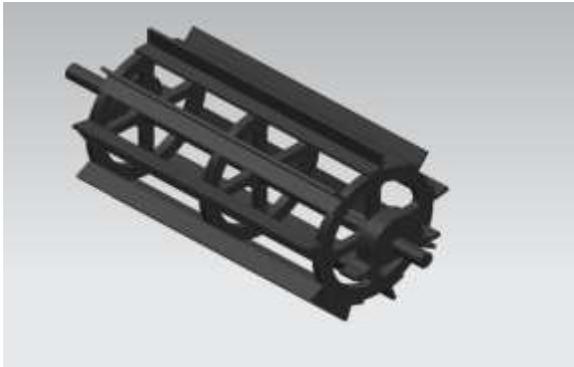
Rotor of through flow, Hold on type, hammer mill Soybean Threshing machine
